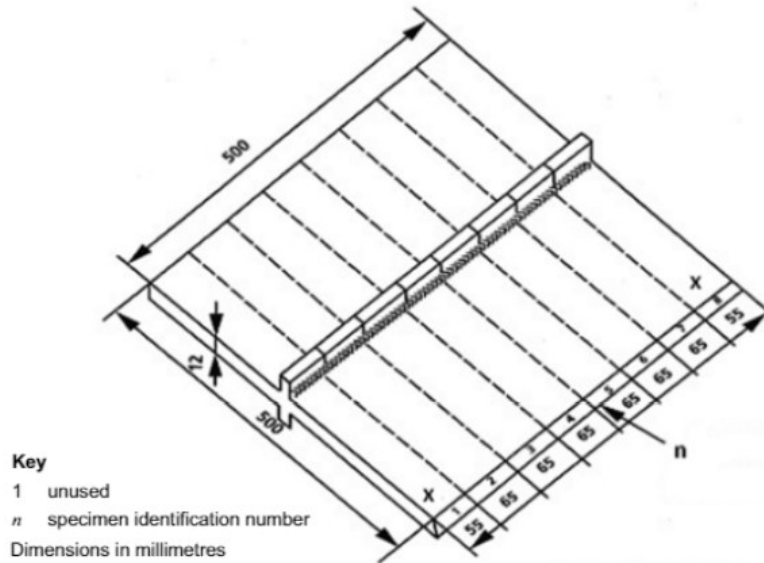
ISO/TR 14345 Example of a welded panel for the extraction of several identical test specimen [54].
